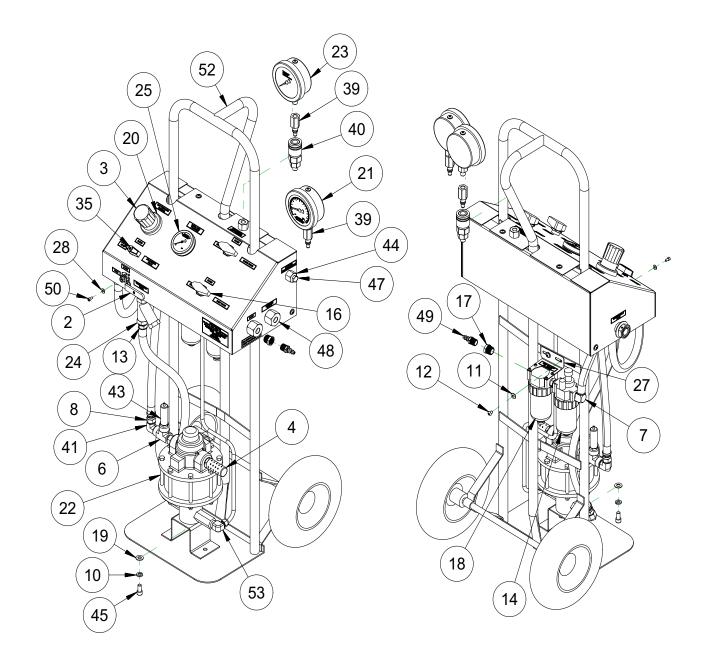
1900 HC ASSEMBLY (P/N 85144)
